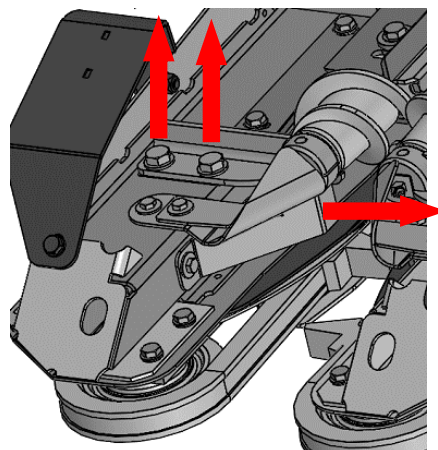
Dismantle the knife guard, remove the screws of the stalk roller holder.
